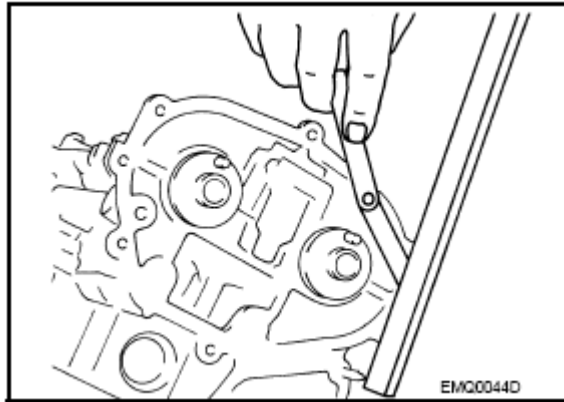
Measuring Difference In Levels Between Front End Faces Of Camshaft Bracket (No. 1) And Cylinder Head
